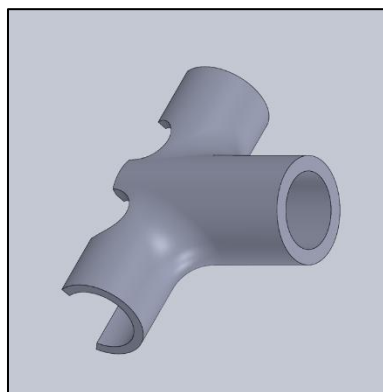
The t-connection piece used to hold the airframe together; rendered in SolidWorks.
